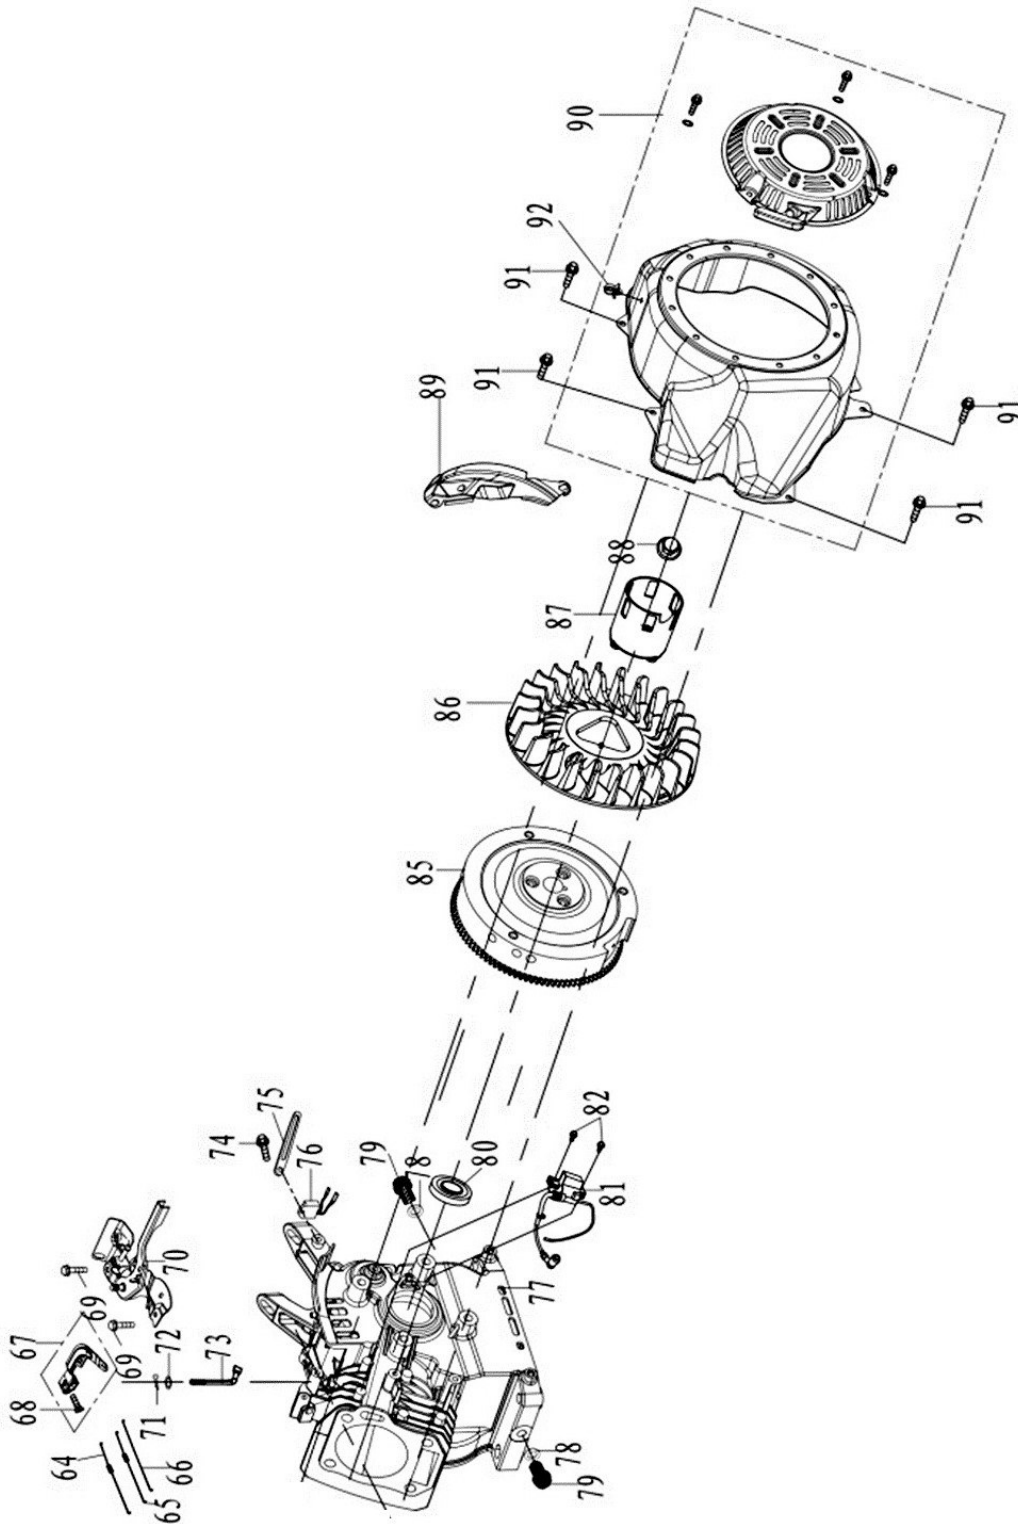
Spare parts drawing 4 PG-E 30 SRA
